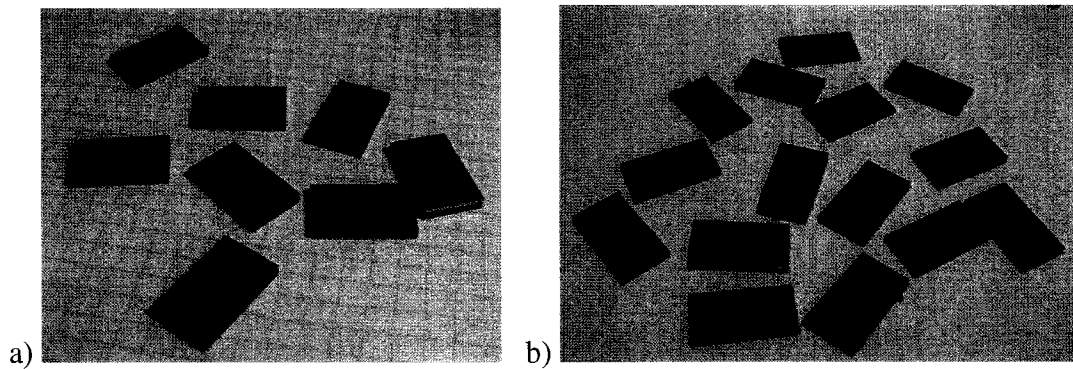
Test samples after re-laminating: a) 0.120" section; b) 0.063" section
